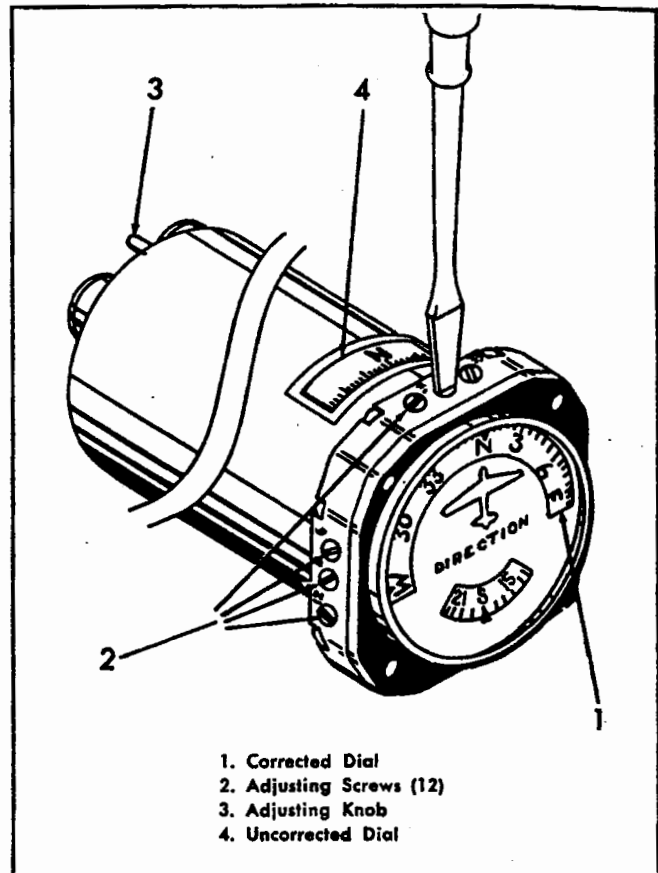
P-3 Compass Indicator Adjusting Screws.
